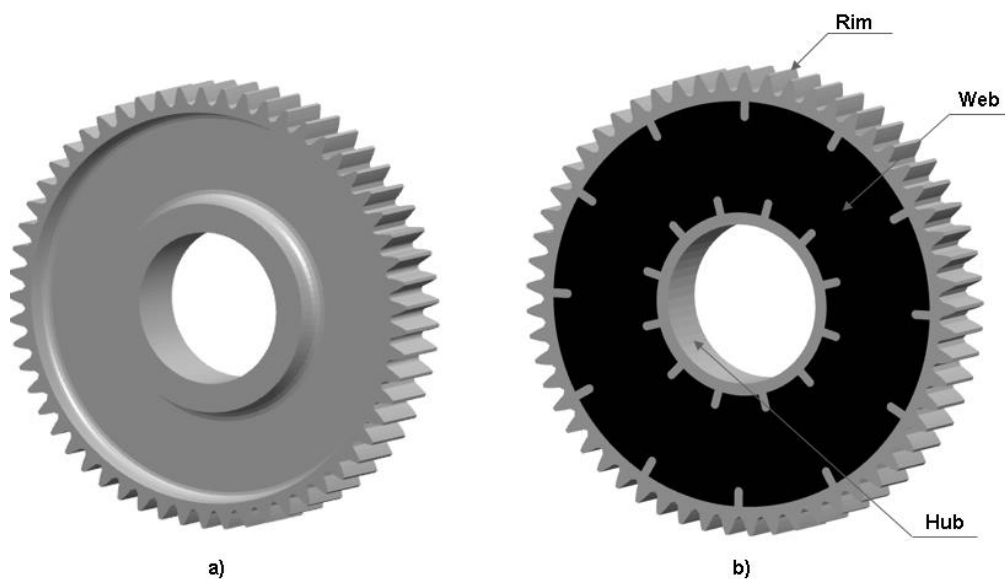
2 CAD model of the lightweight steel gear a) and of hybrid gear b).
